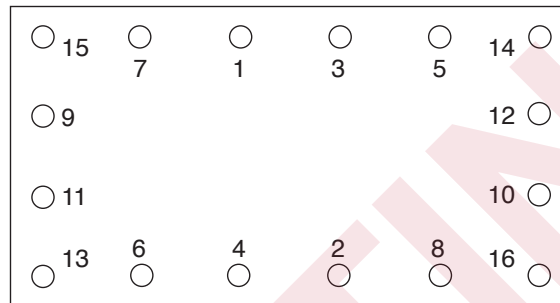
Torquing Pattern for Profibus Indicator Interface Enclosure
